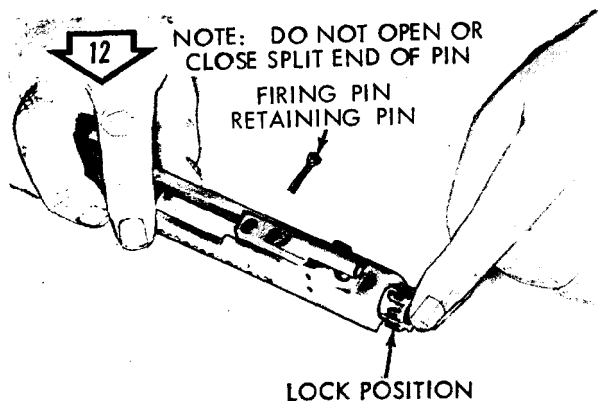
Disassembly/assembly of rifle. (2 of 5)
